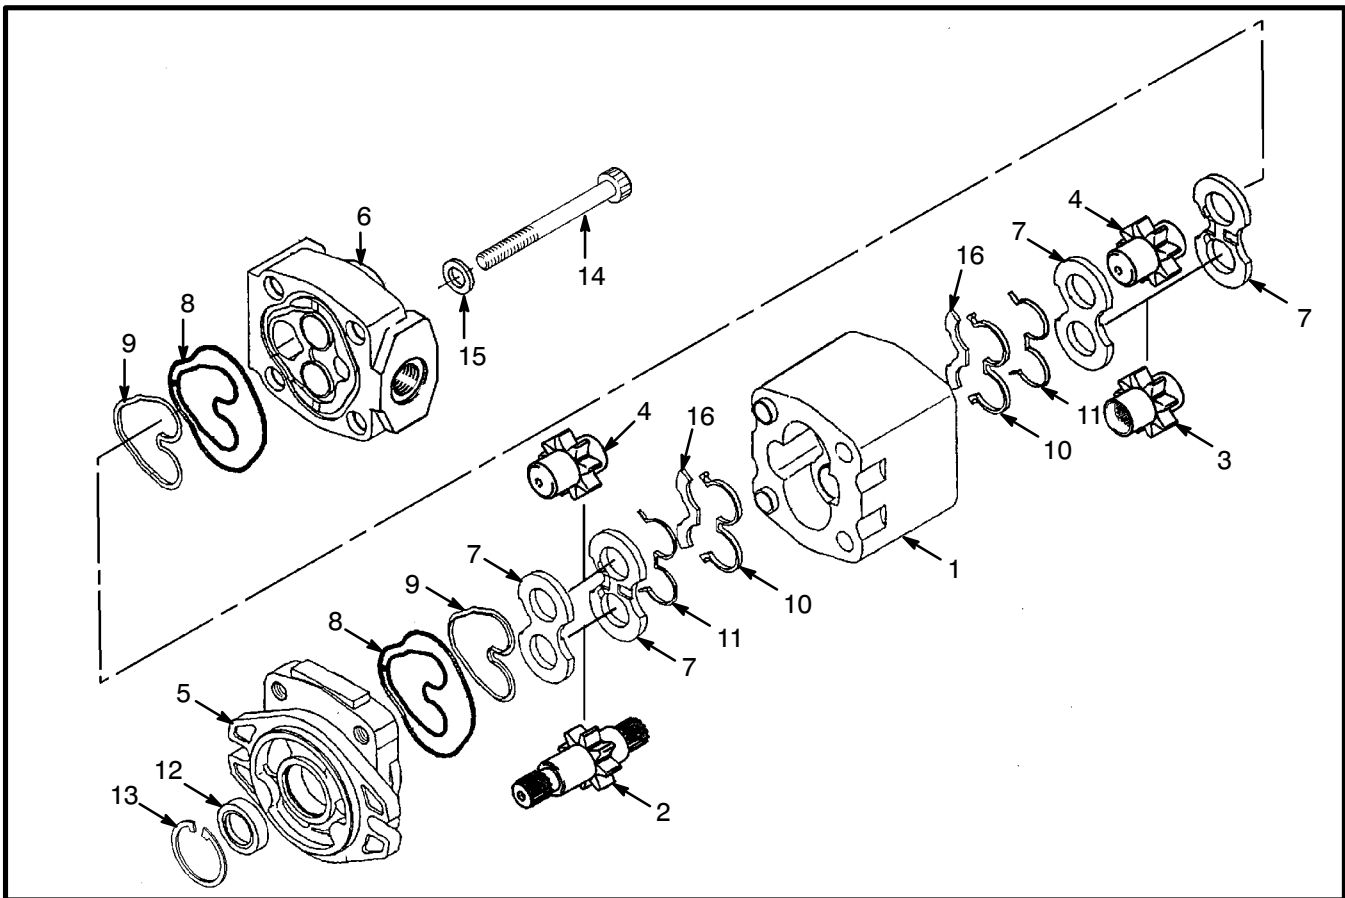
GEAR PUMP ASSEMBLY, DUAL GEAR SET
